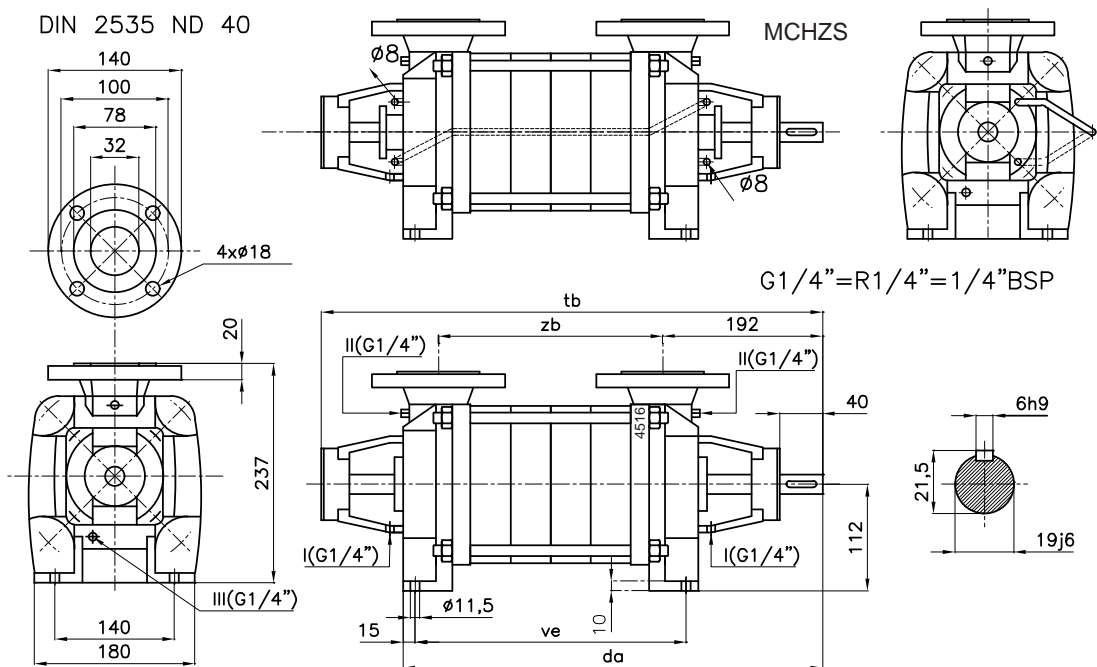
Dimensions sketch MCHZ(S) 12,5.
